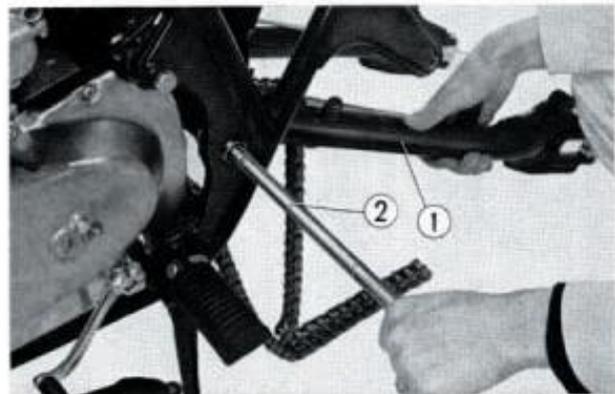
① Rear fork ② Rear fork pivot shaft
